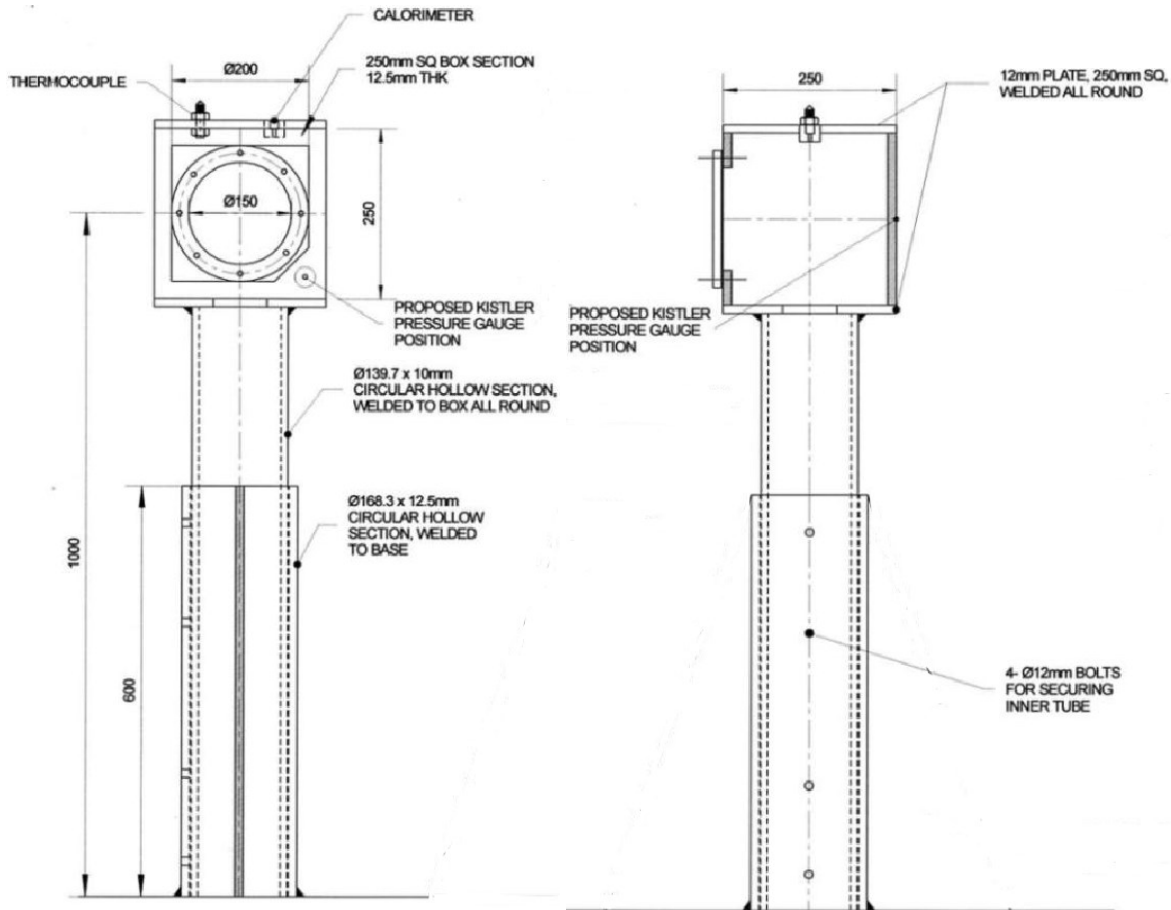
Design of Heavy Structural Boxes (Front & Side Views)
